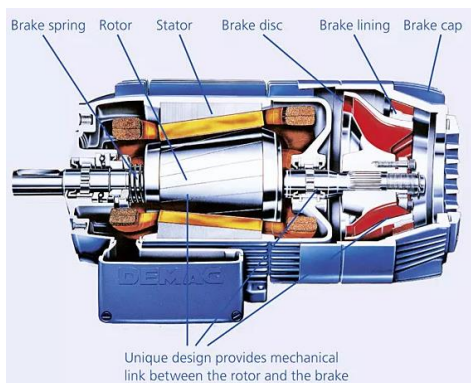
Demag Conical-Rotor Brake Motor (KB series) using conical friction disk ([ref](#))
